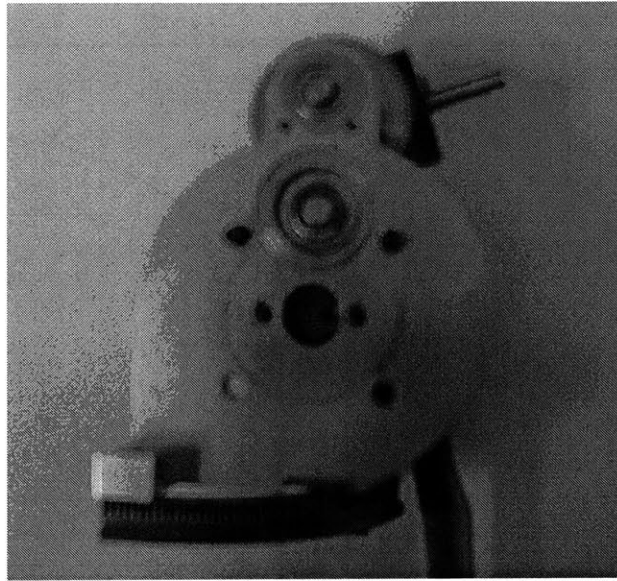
Side view of the differential transmission housing; notice the eccentric bearings.
